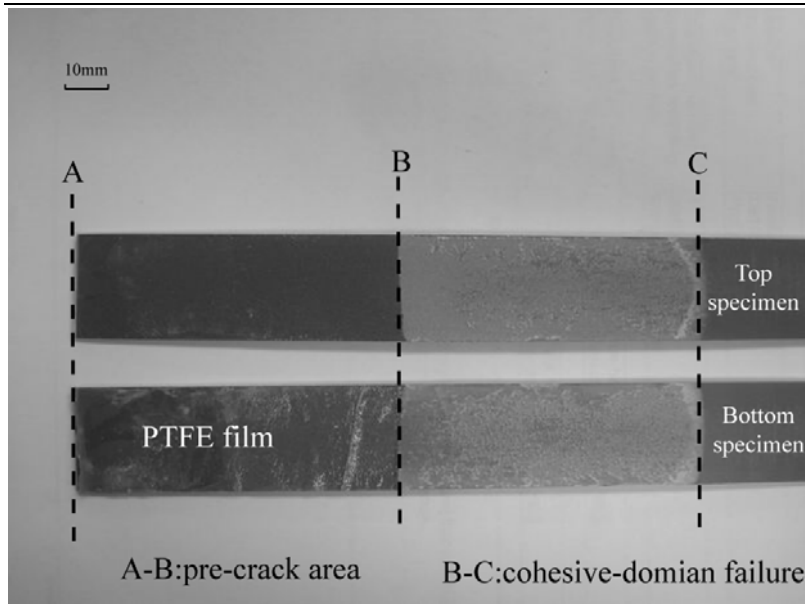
14 Fracture surface of 4 point ENF test using 0.2mm adhesive
